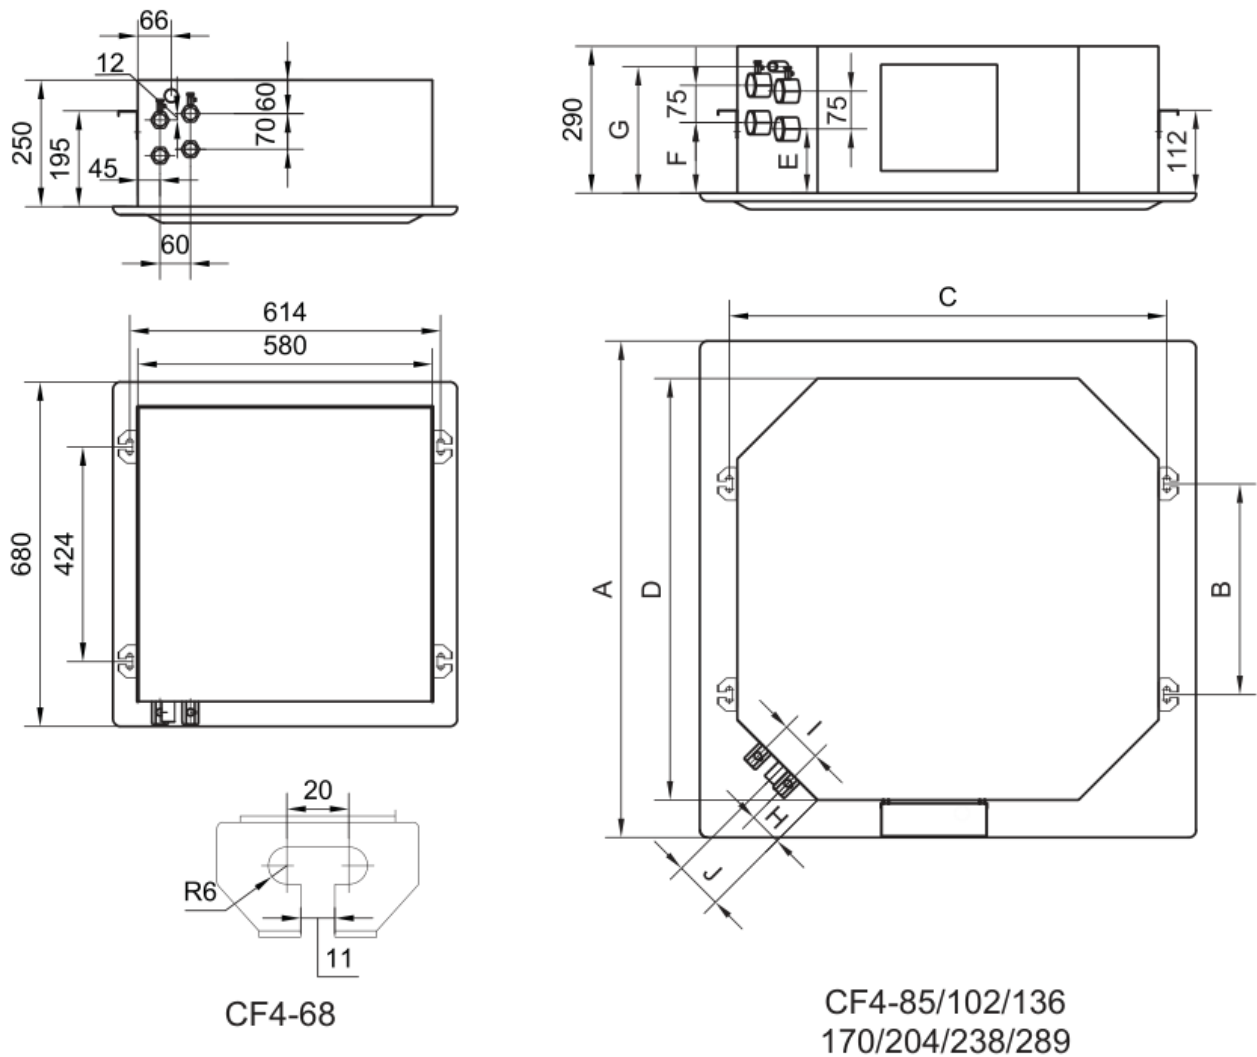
Dimensions, CF4 (all dimensions in mm)
